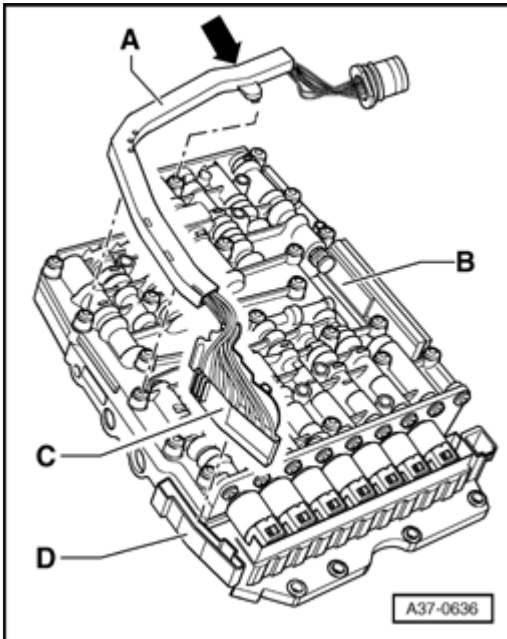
Locating Wiring Harness With Connector Is Attached To The Mechatronics Unit
